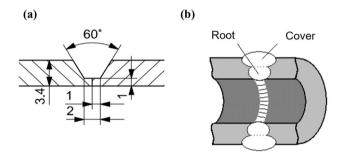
a Standard weld preparation geometry, b root and cover pass
